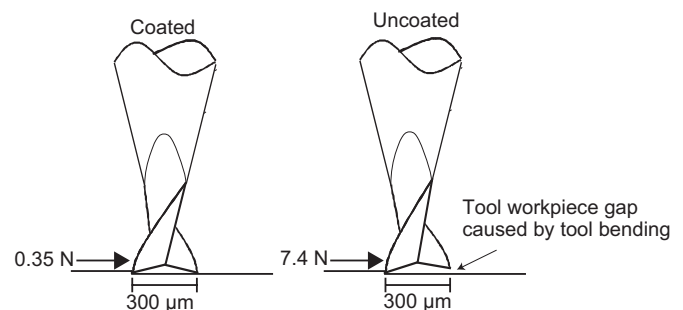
Comparison of a coated and uncoated end mill during machining. The higher forces of the uncoated tool produce a deflection in the end mill causing for the retreating cutting edge to liftoff from the workpiece.
